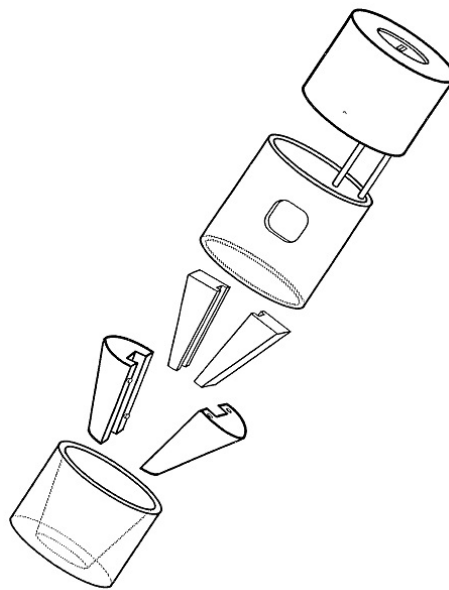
Exploded view of the Modified Celasese Test Fixture [5]
